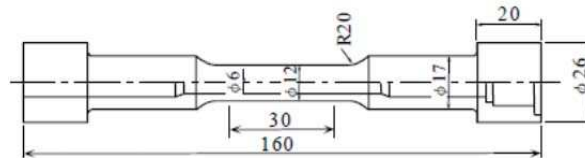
□ Hollow cylindrical type specimen, dimension in mm [8].
